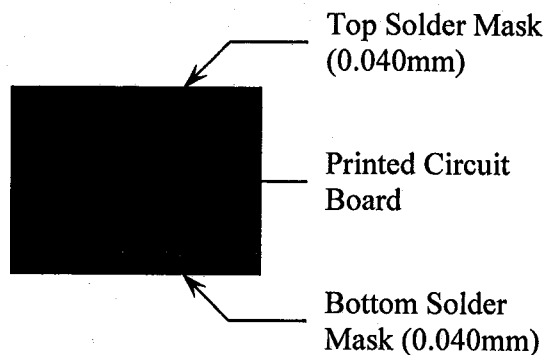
Layer dimensions of printed circuit board (Intel).
